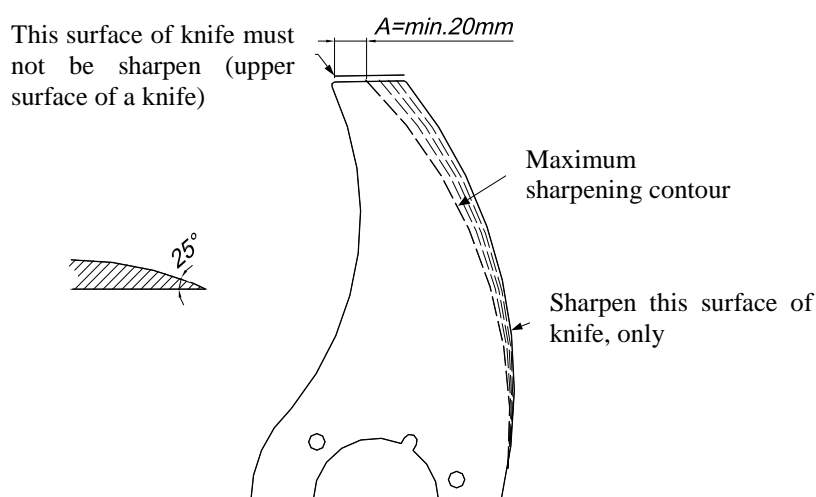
KN-125 cutter knife type U3 profile and angle of blade to sharpen.
